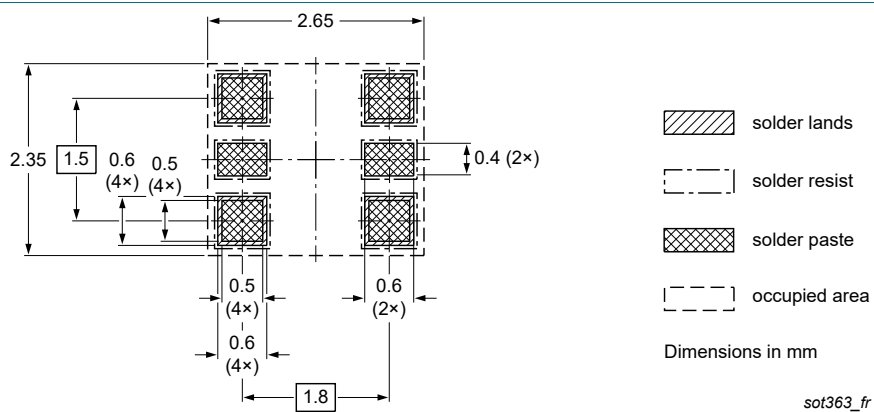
Reflow soldering footprint for TSSOP6 (SOT363)
